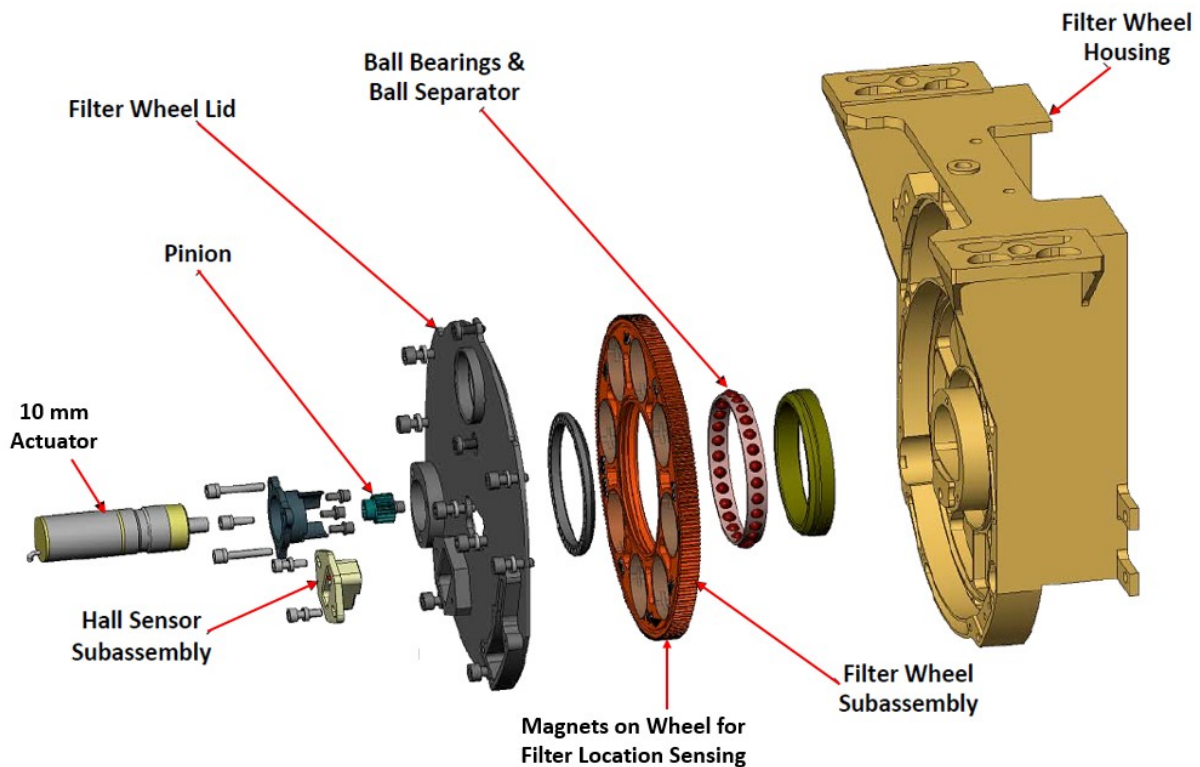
Filter Wheel Assembly Application of the 10 mm Actuator
